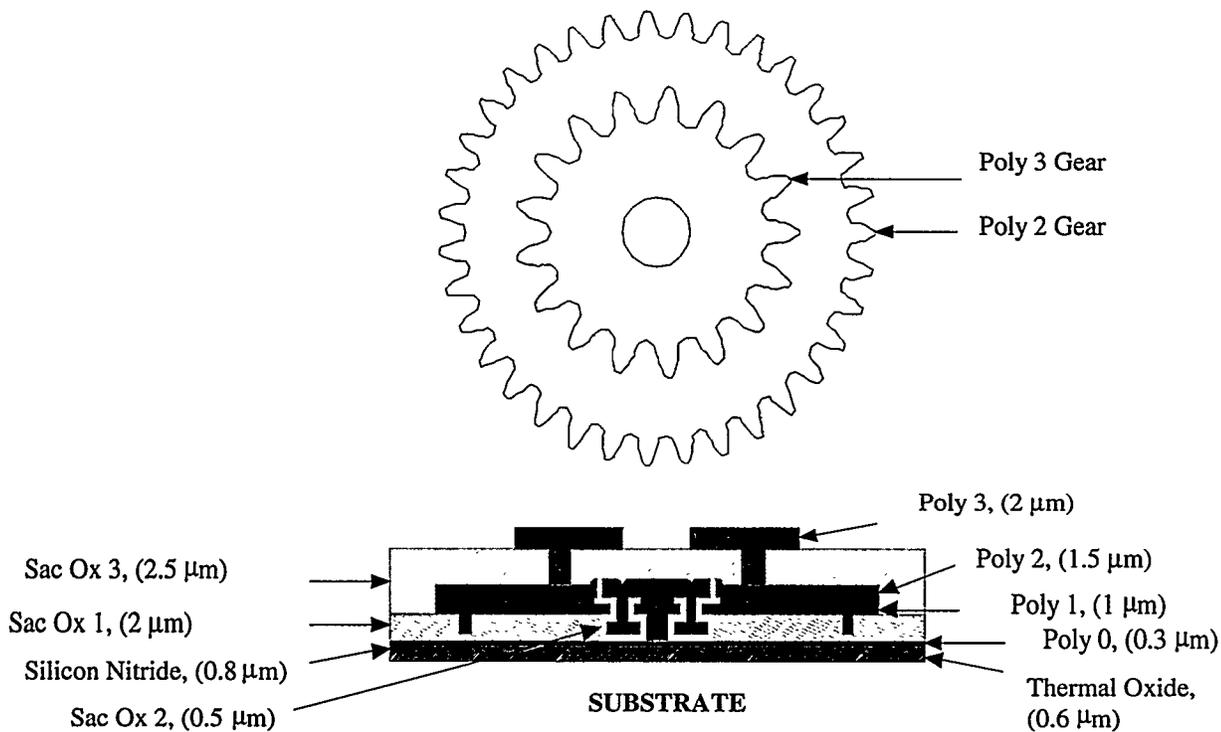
Cross-sectional view of a set of gears fabricated using the SUMMiT process.
